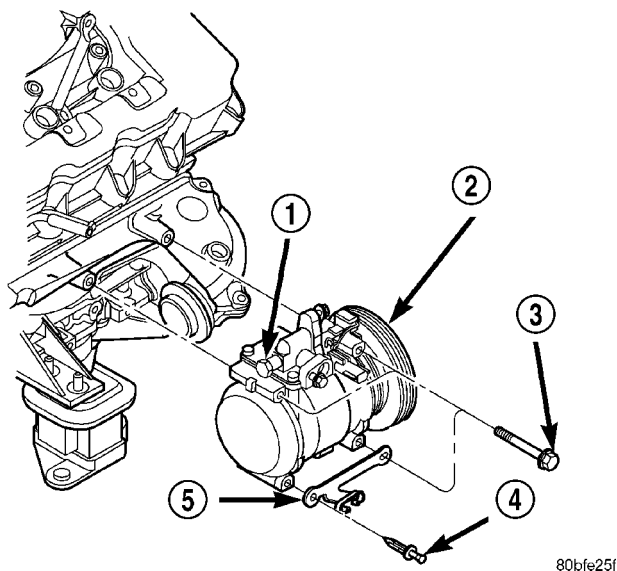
COMPRESSOR MOUNTING - 2.7L
